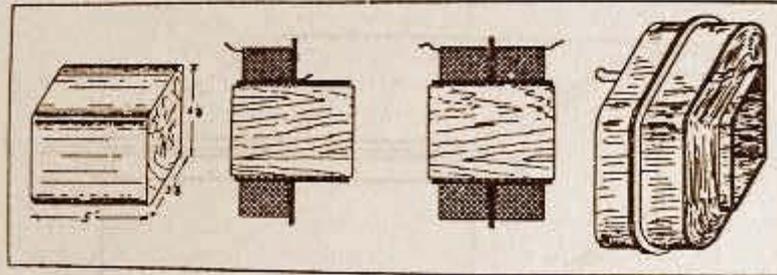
Details of secondary winding showing wooden block or form upon which the wire is wound
